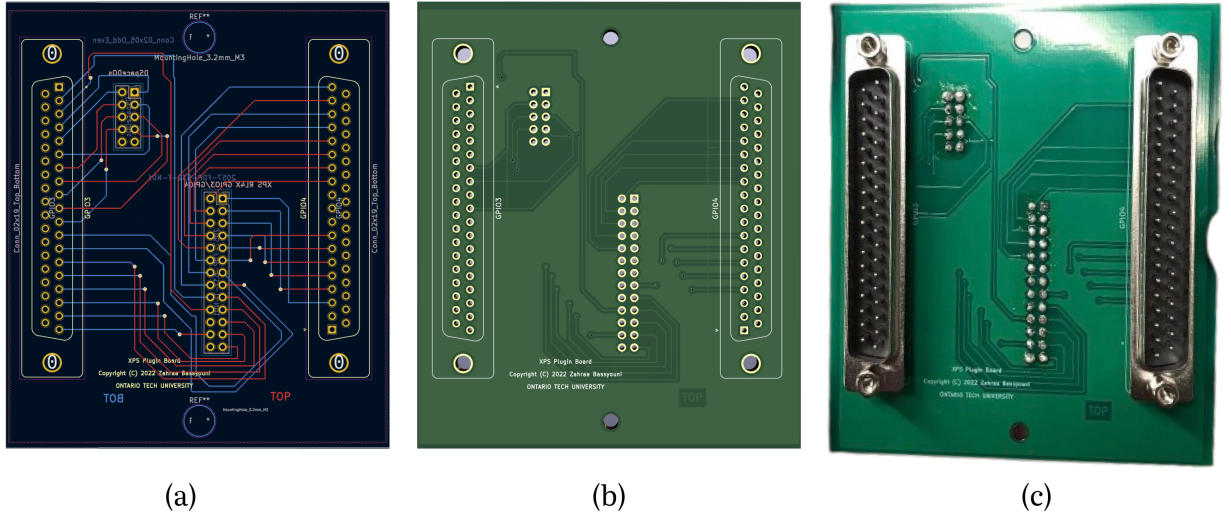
XPS Plugin Board. (a) Board Design on KiCad. (b) 3D View on KiCad. (c) Physical Implementation of PCB with soldered component.
